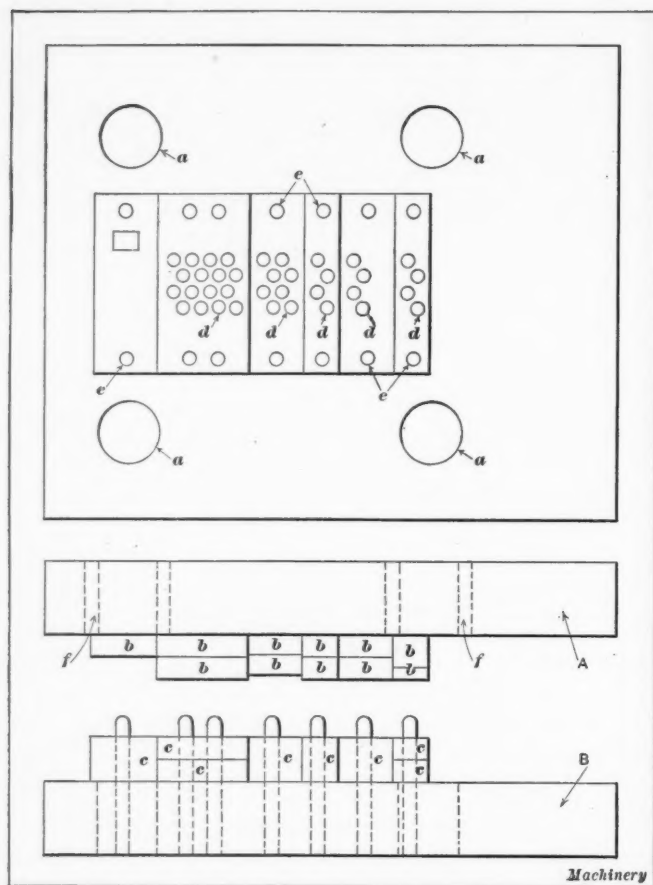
Diagrammatic View illustrating Method of constructing Socket Die
